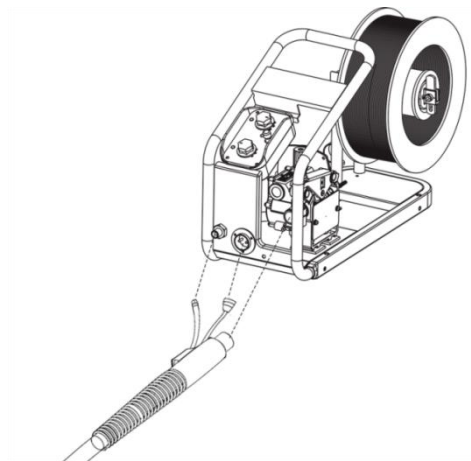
Connection of welding torch of open type manual wire feeder
